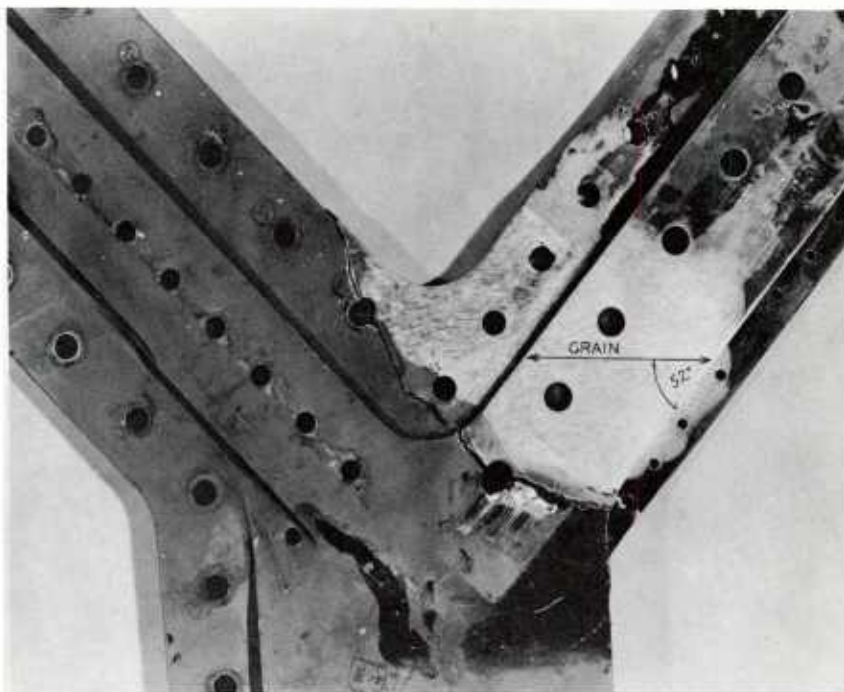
A failure in a 7075-T6 forging.
